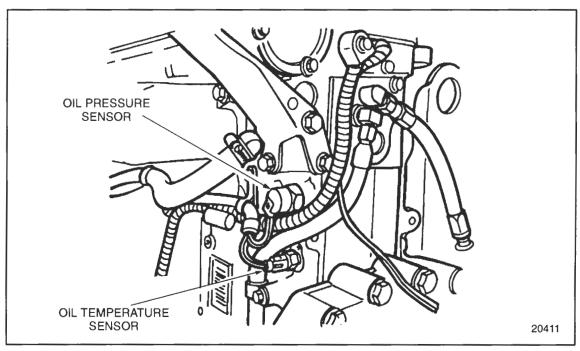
Engine Oil Pressure and Temperature Sensors
